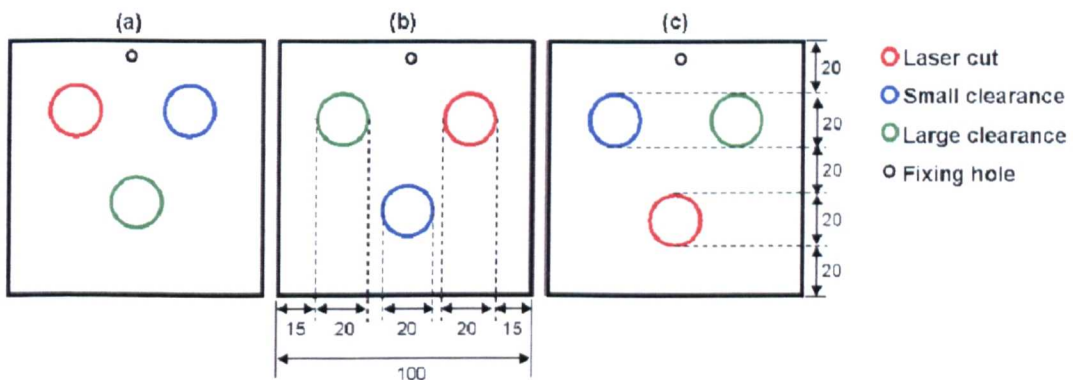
Design of edge corrosion test panels used in this work. The position of each edge type was rotated, as illustrated in (a) – (c). Dimensions in mm, position tolerance ± 1 mm.
